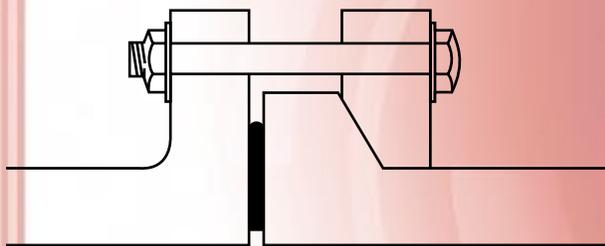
Loose ring flange with O-ring profile gasket with steel ring
